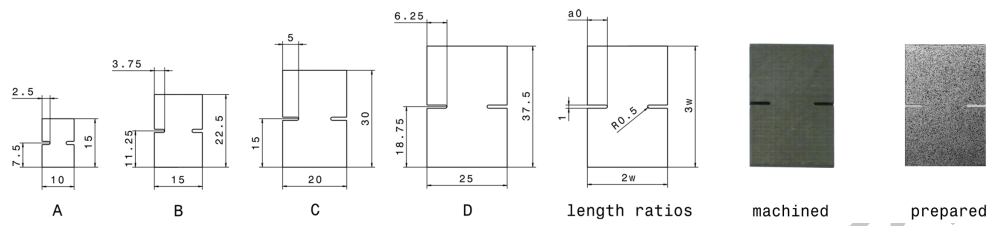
Used specimen sizes (dimensions in mm), machined and prepared specimen for DIC measurement (size D).
